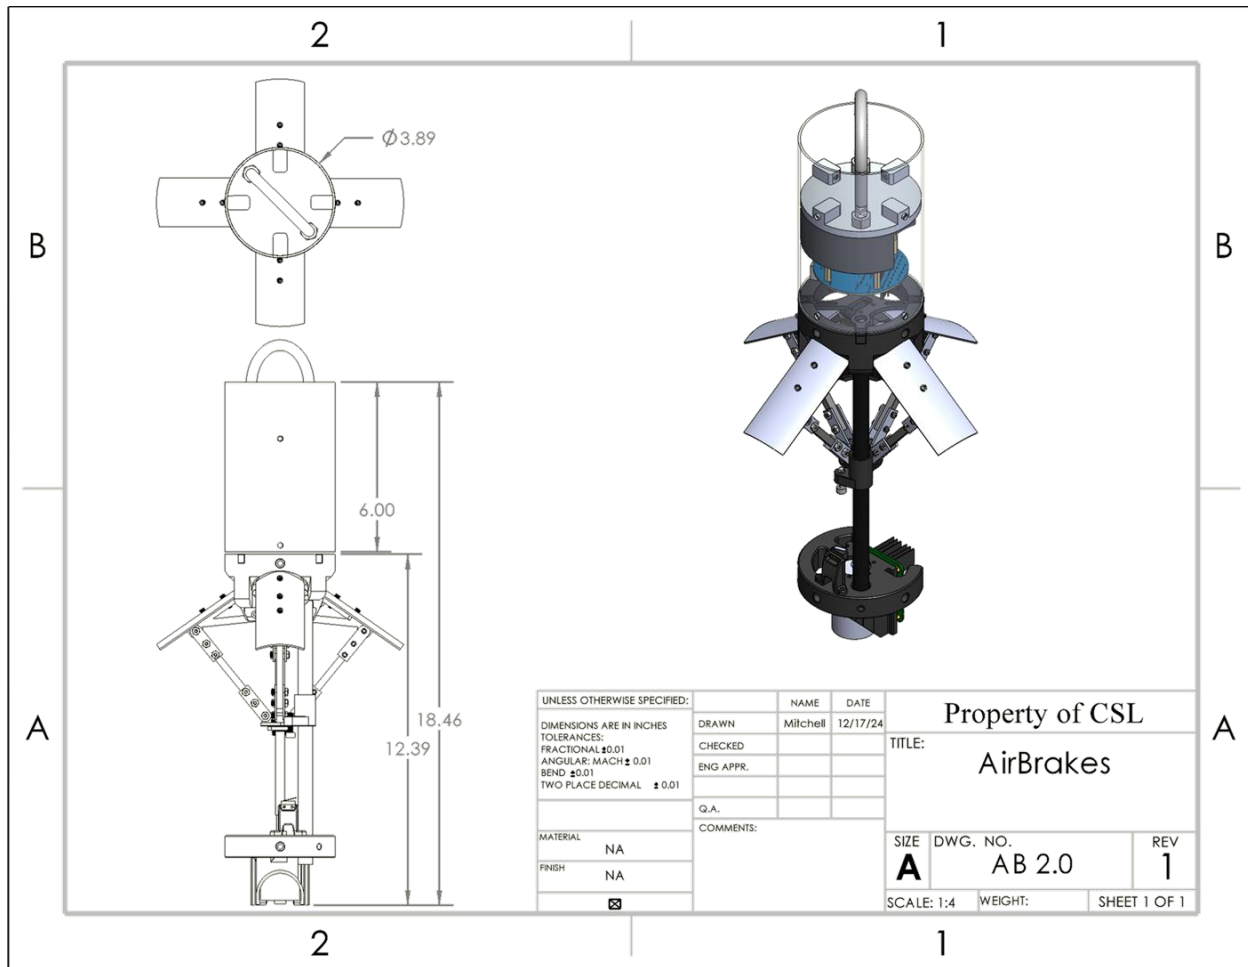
Technical drawing of airbrakes subsystem with critical dimensions.
